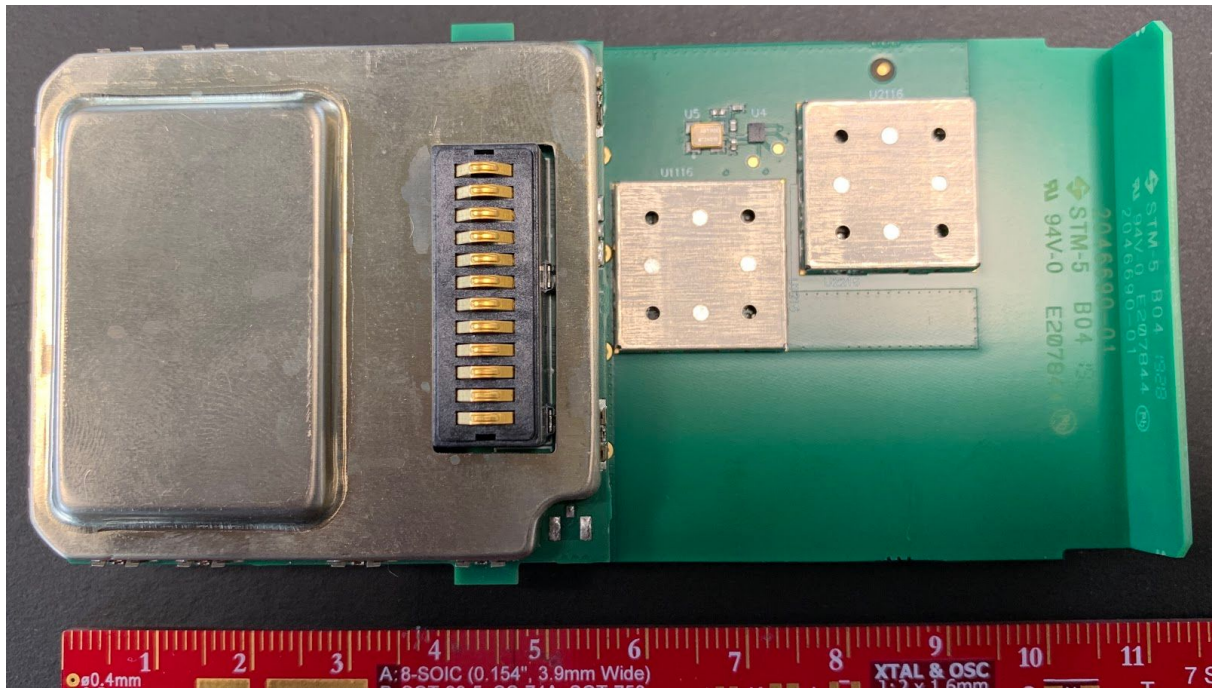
Picture of the bottom of the part 100601 Connector-Main-Board assembly US
